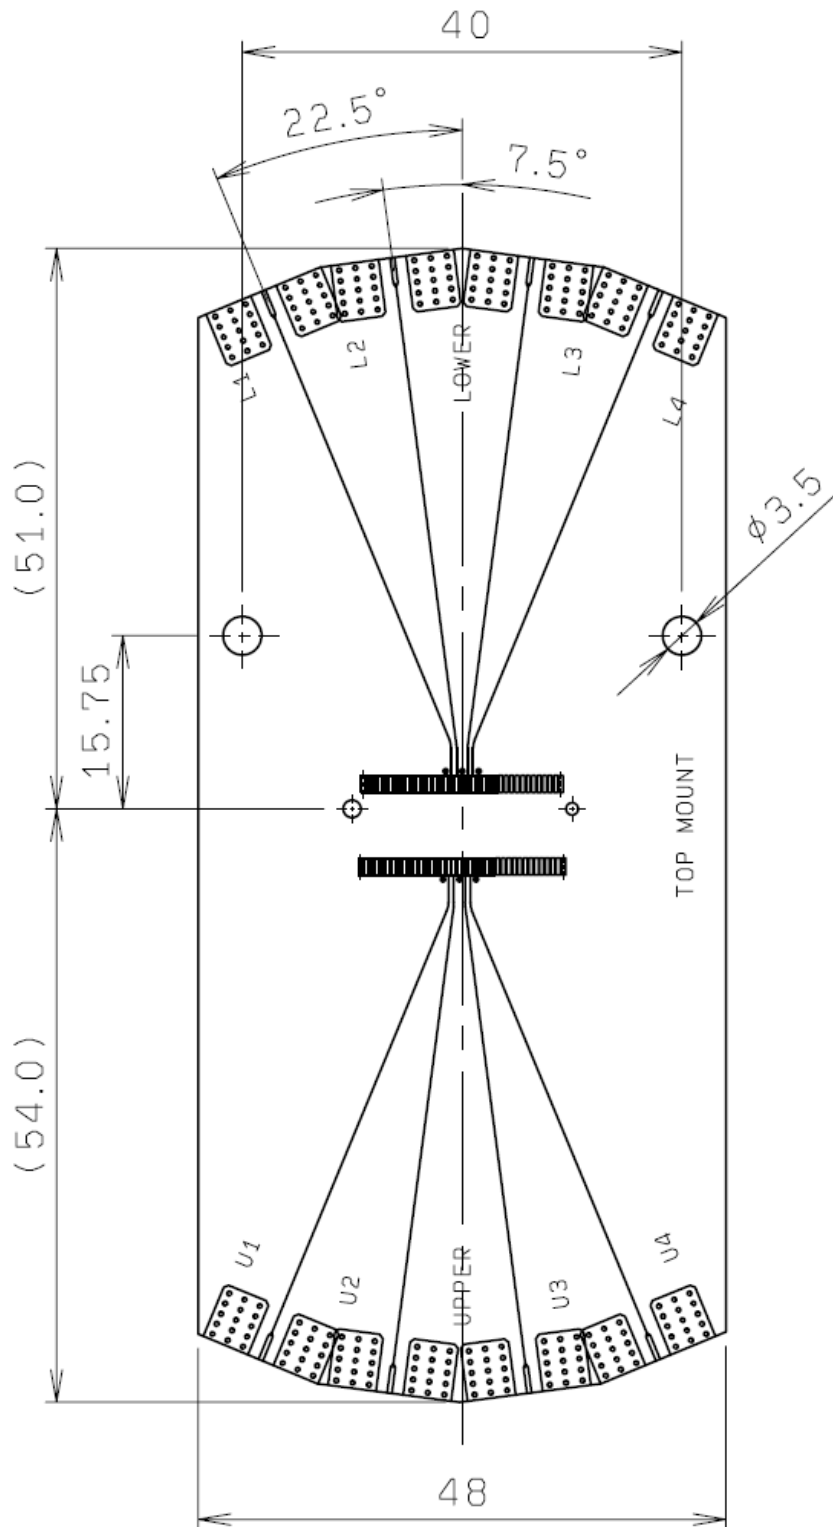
Top Mount ~~Mother Board~~Motherboard Test Fixture PCB
